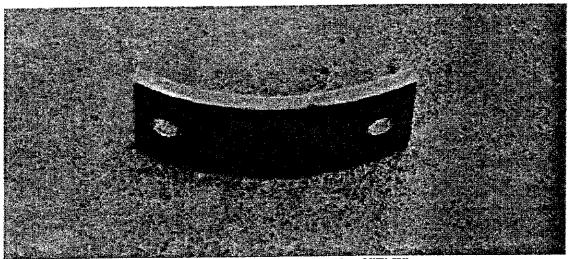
Steel Plate Used to Anchor NiTi Wires
